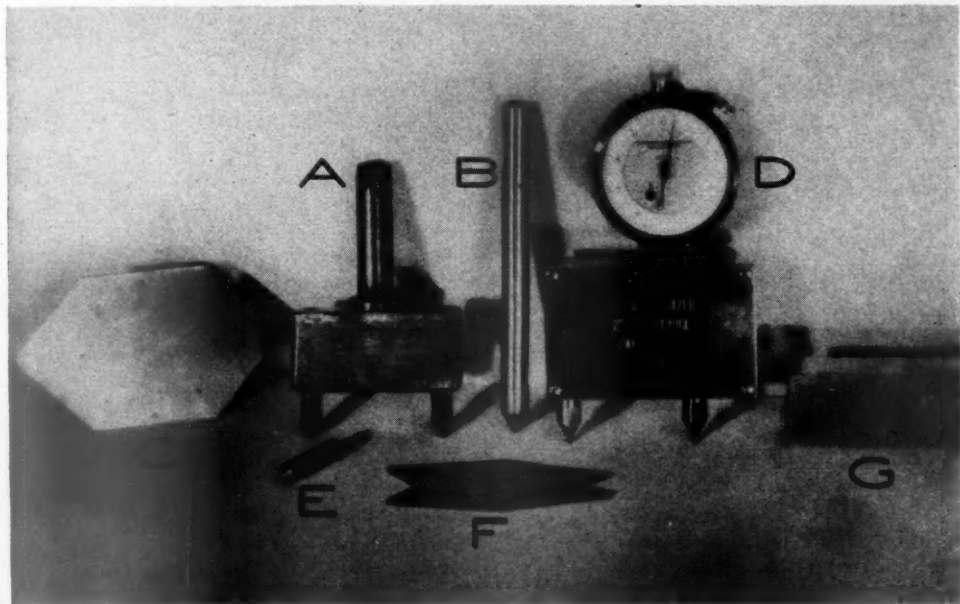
Special tools required for making punch marks on wheels and for measuring rosettes
